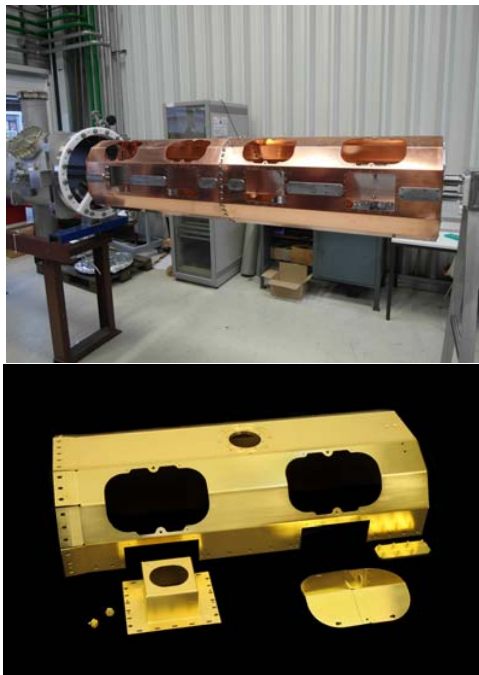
Up: Copper cryoshield before mounting in the prototype tank. Down: Cryoshield parts after gold plating.
